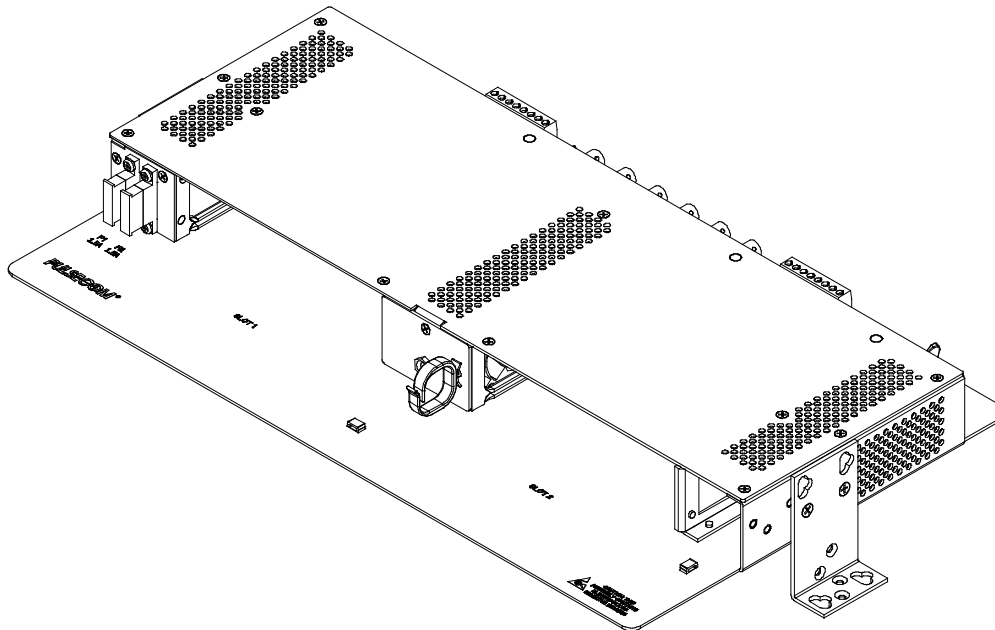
203D3-19A REV B Wall Mounting – Bracket Orientation
